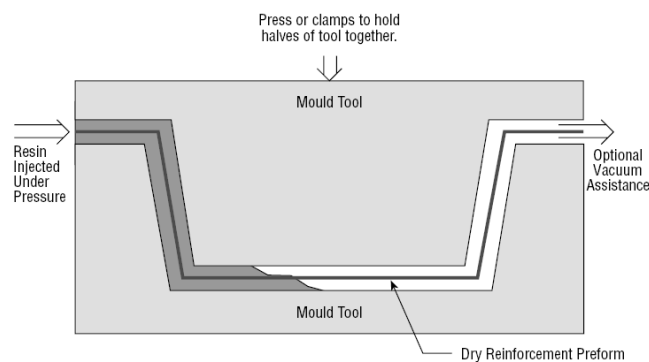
Schematic View of Resin Transfer Molding Process [2, 3]
